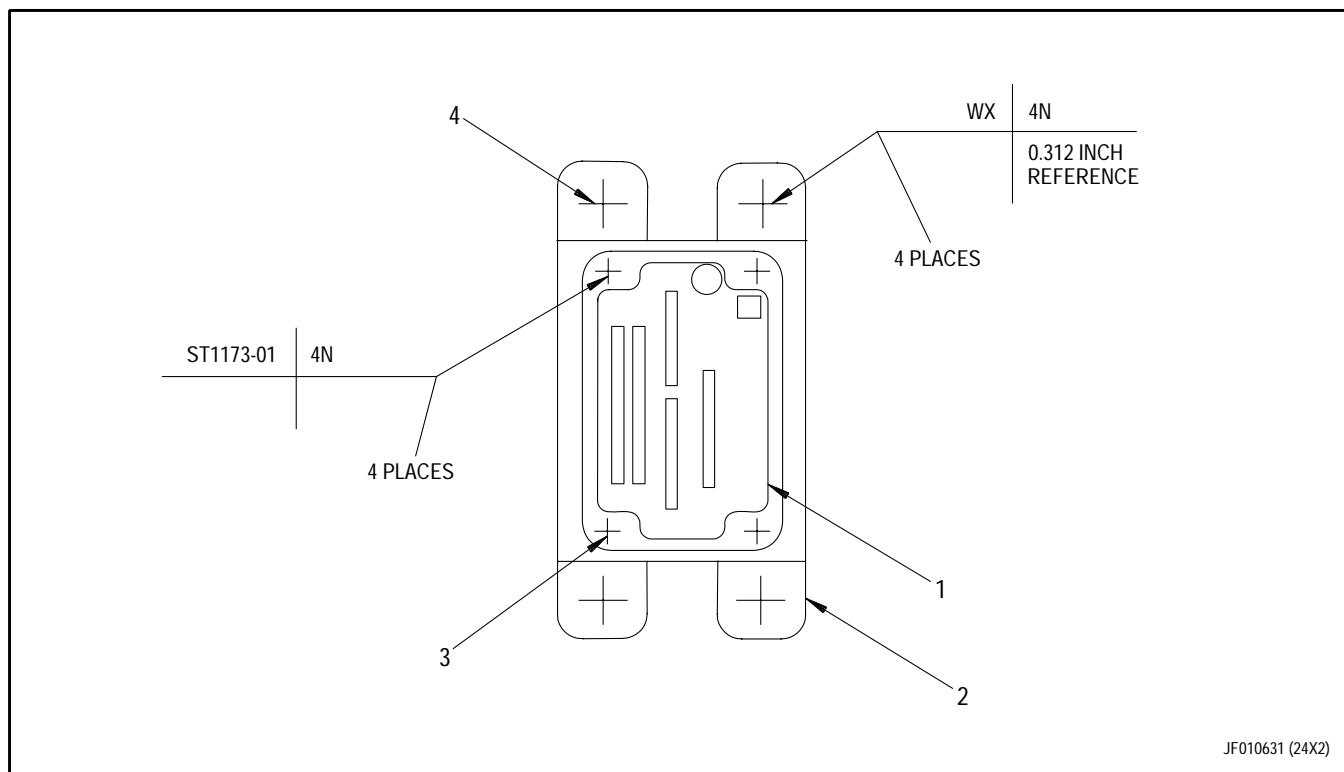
Fan Case Assembly - Borescope Boss Rivet Replacement
